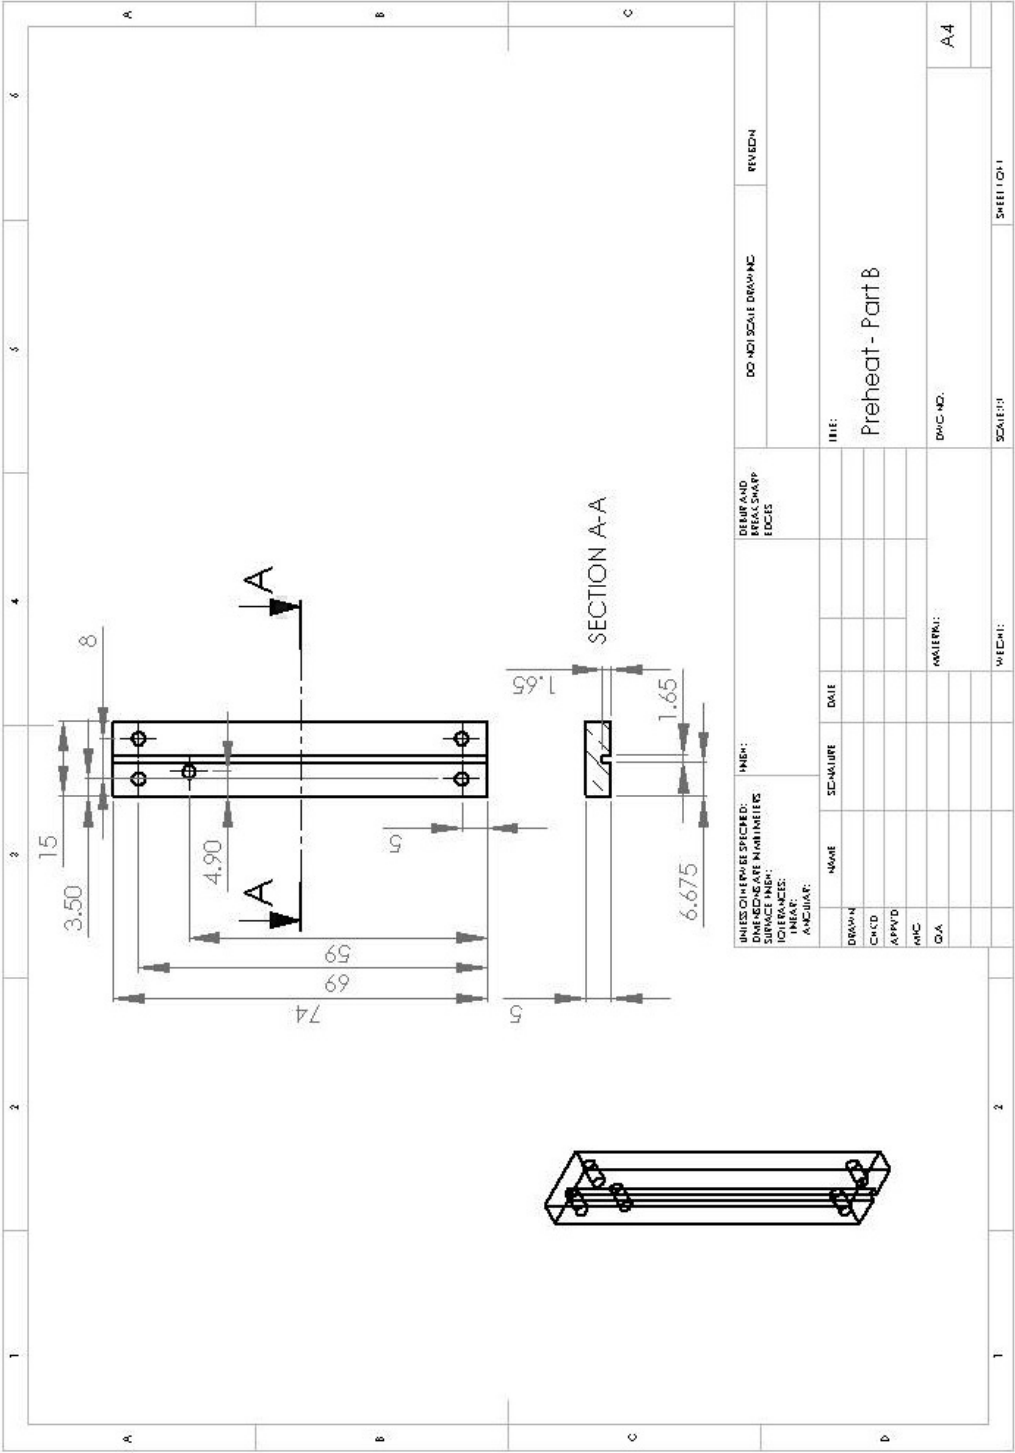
Part B of the preheat used in chapter 4 - Dimensions in mm.
